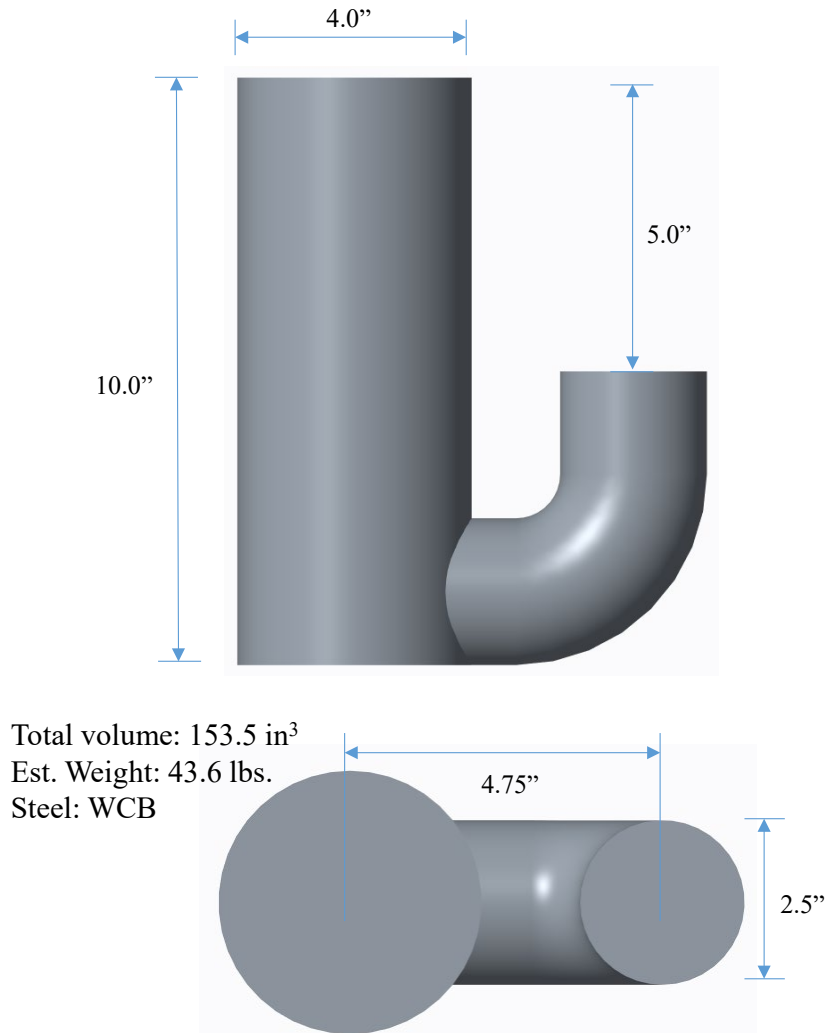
Dimensioned side and top views of porosity experiment case D (the blind riser with bottom contact).
